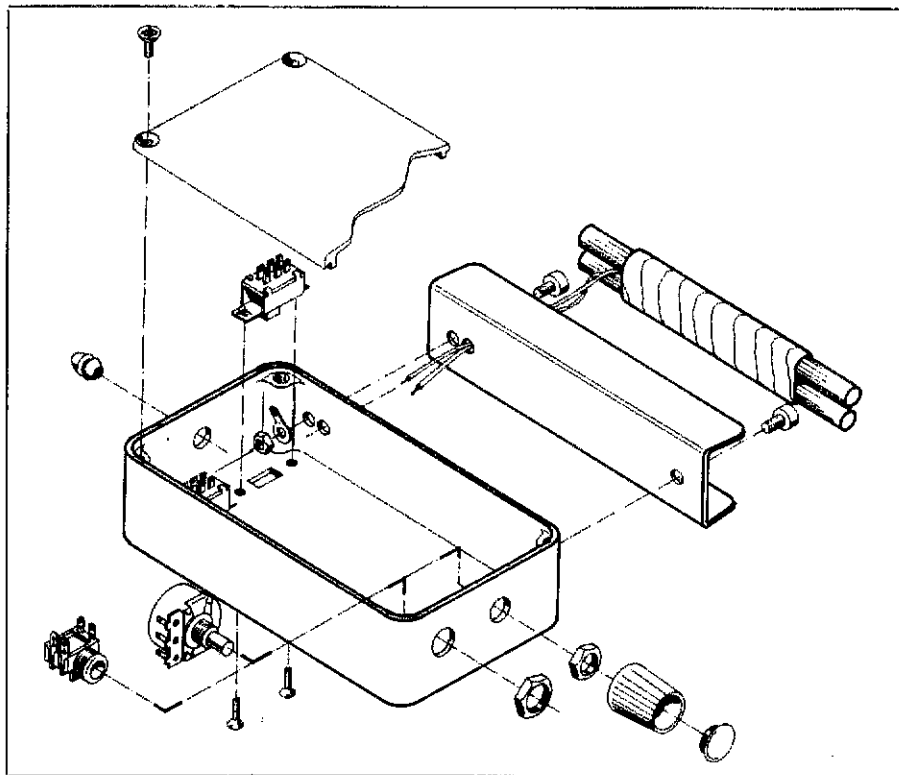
Exploded view of the receiver, showing methods used to mount parts not included on the circuit-board assembly.
